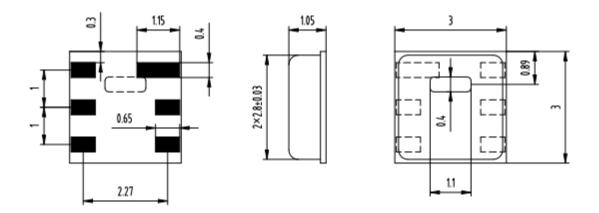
WHT20B Sensor package (Unit: mm Tolerance: \pm 0.1mm)
